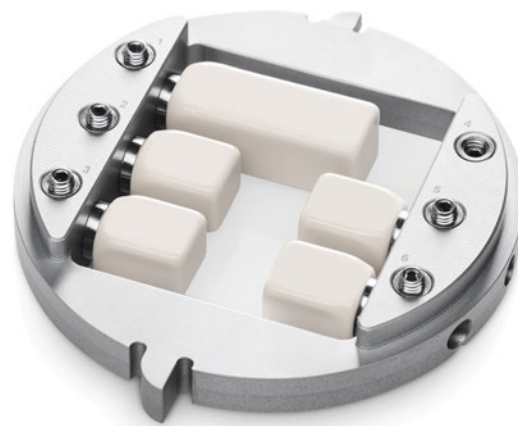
AN R5 BLOCK HOLDER WITH 5 MOUNTED BLOCKS
